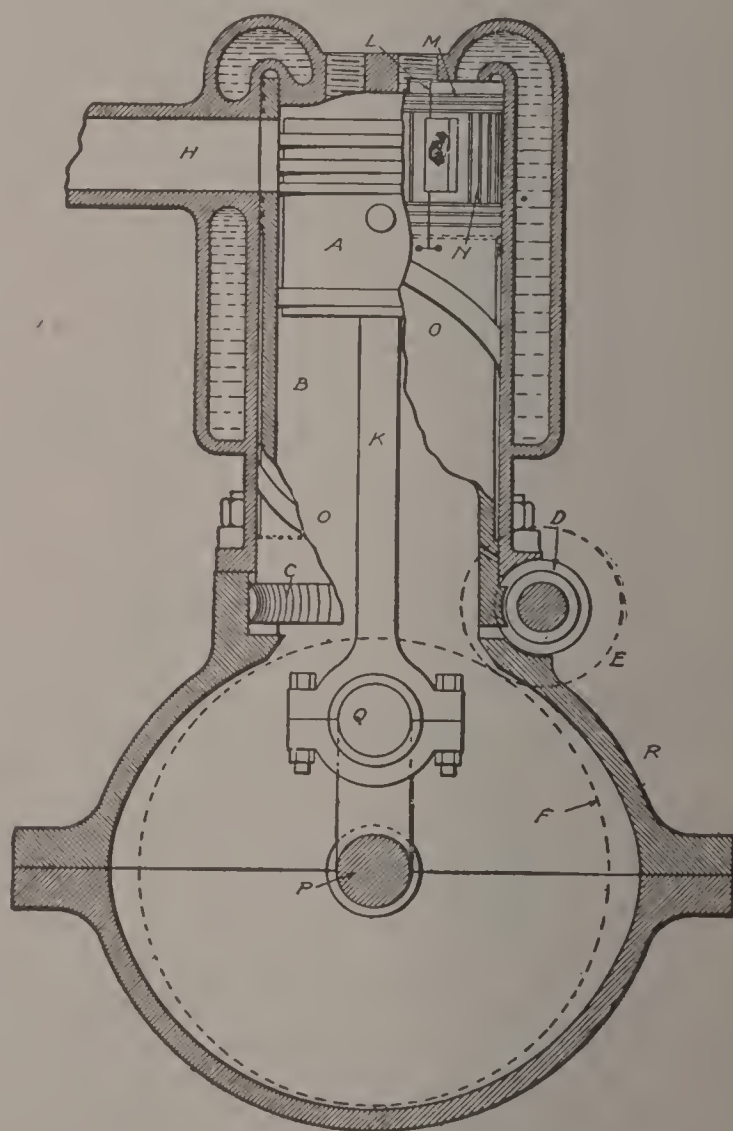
Section through Ledru (French) Camless Engine. The Rotary Gear-Driven Sleeve Displaces All Cams
